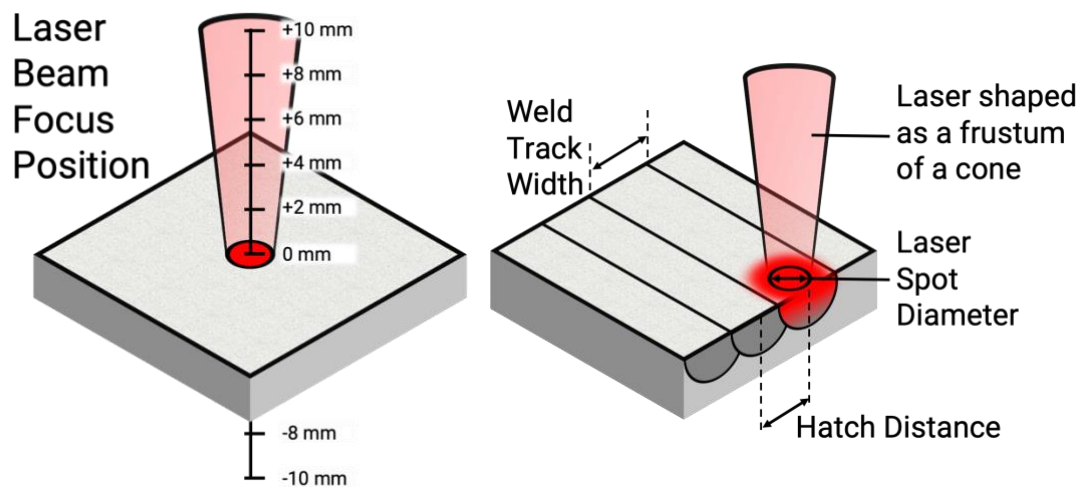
Example of the focus position of the laser beam (left), and example of hatch distance, laser spot diameter, and weld track width (right).
